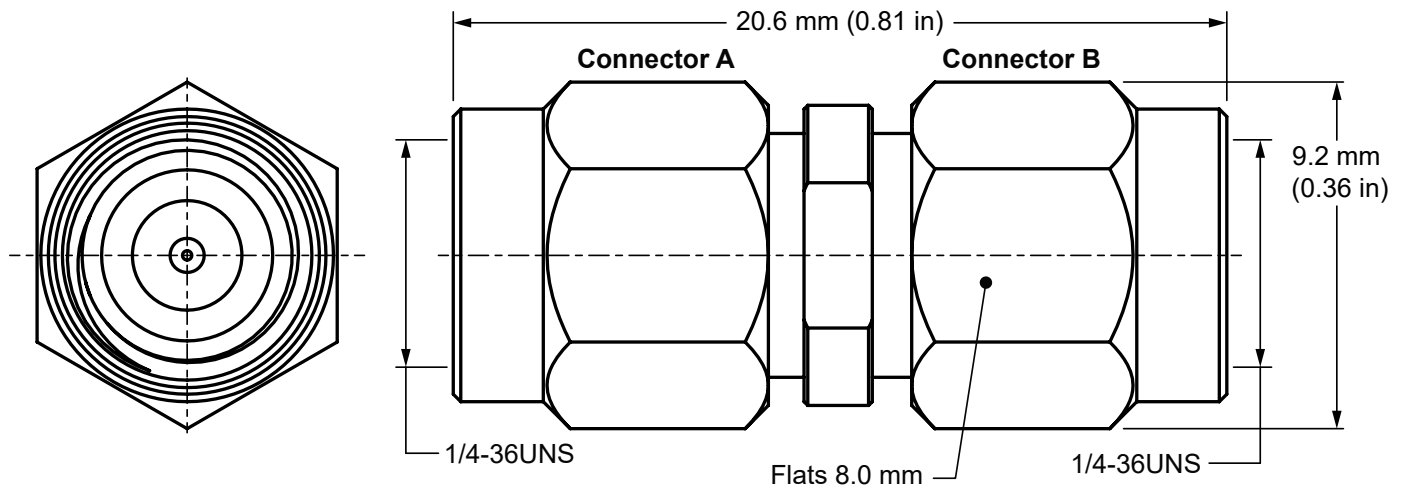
Product Dimensions for the ADP-2.92M-2.92M Adapter
